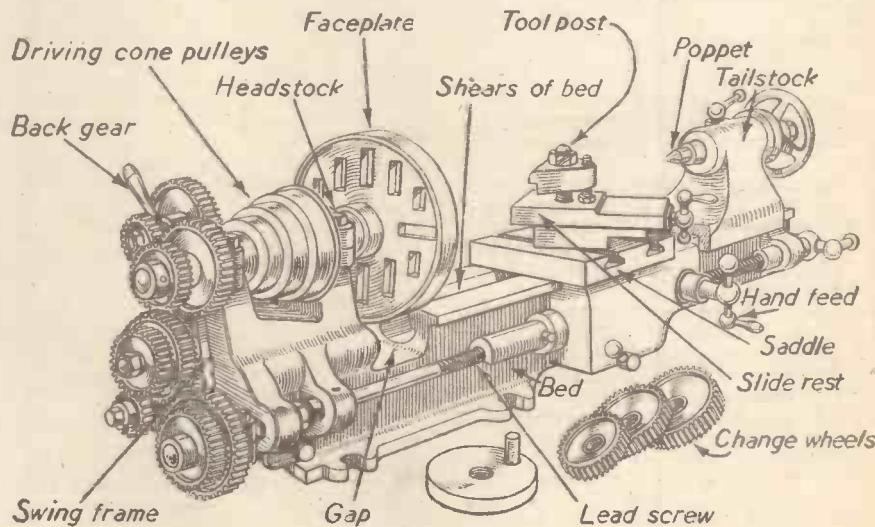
An explanatory diagram showing the various parts of a lathe.
